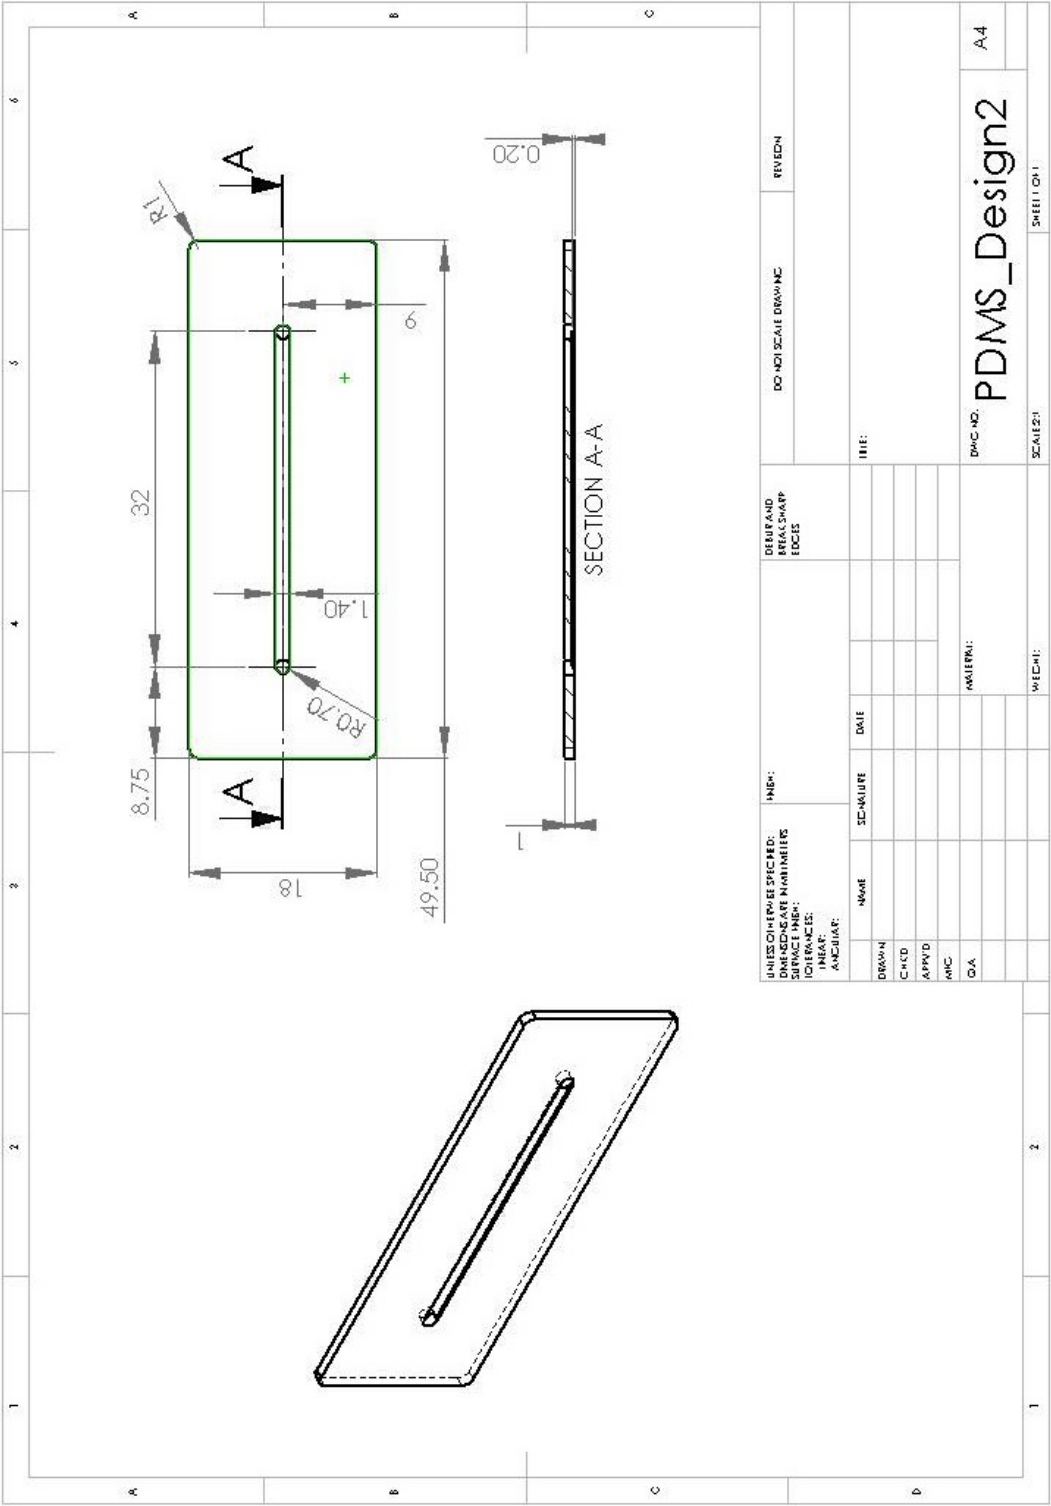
Microfluidic layer for the second and third generation packaging system - Dimensions in mm.
